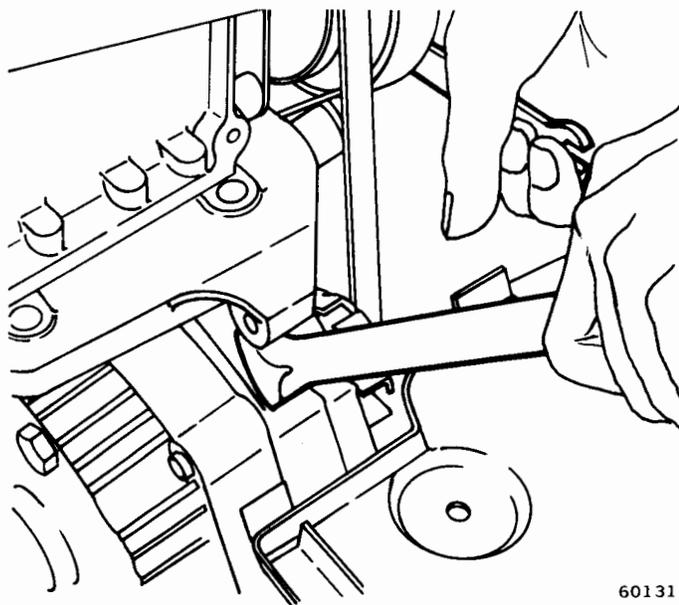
Alternator Adjustment—Six-Cylinder with Air Conditioning
